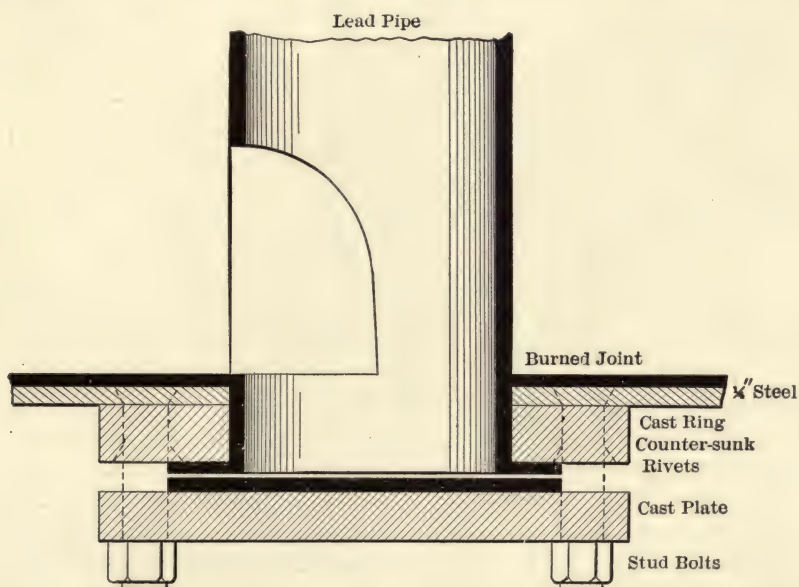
Detail of Montejus lead lined tank construction. Showing solution pipe connection at bottom.
